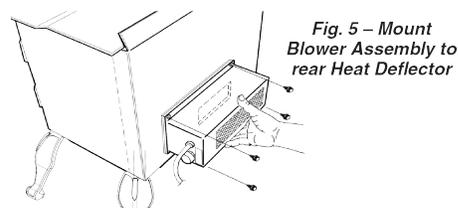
Mount Blower Assembly to rear Heat Deflector
